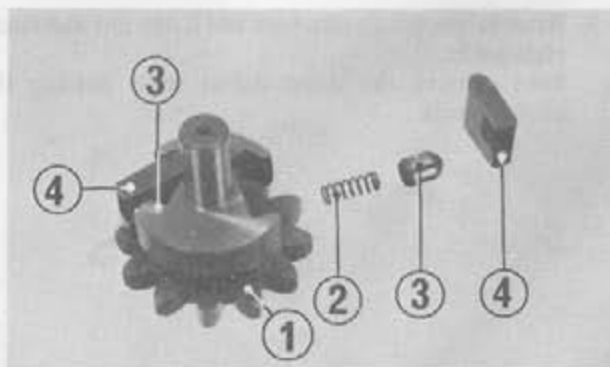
(1) Drum shifter (2) Pawl plunger spring
